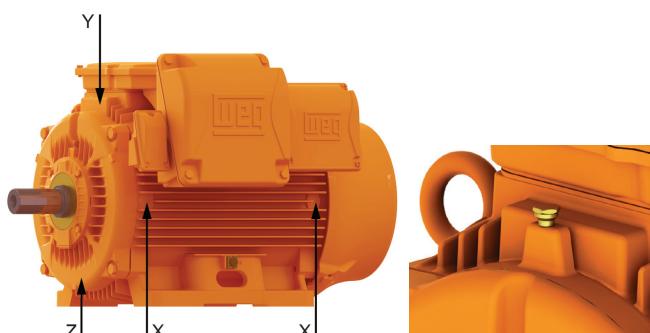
Flat surfaces for vibration checking (frames 225 to 355)
